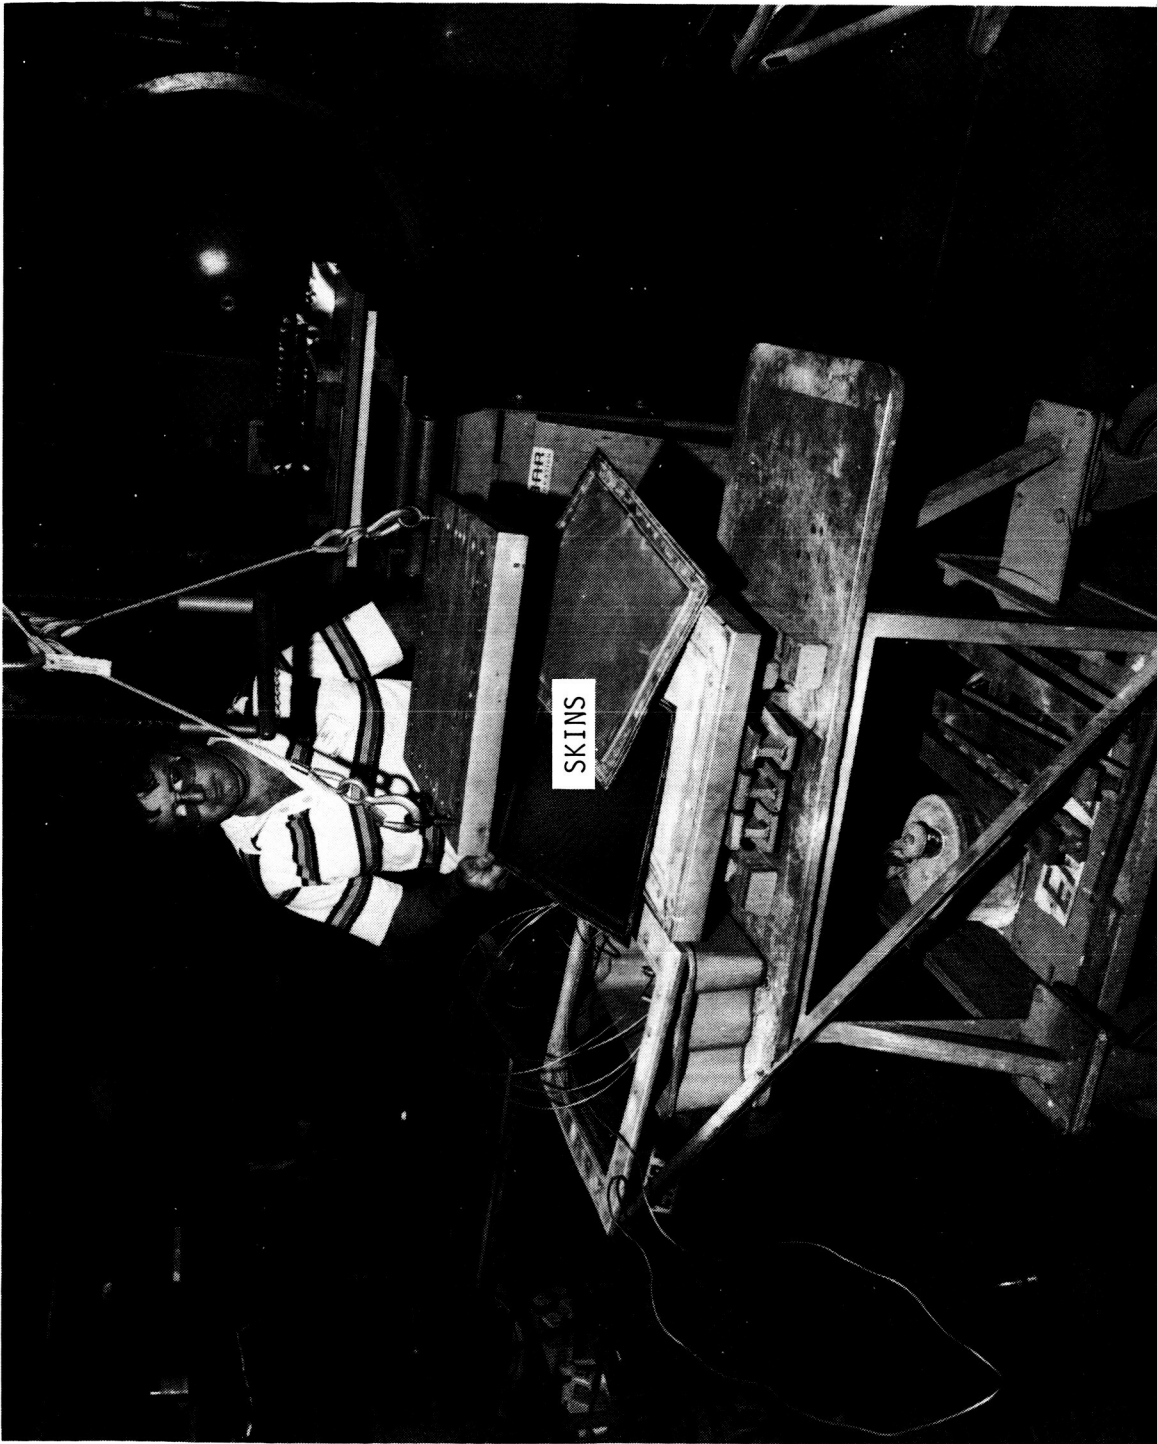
Tool Proof Parts (Un-Trimmed Titanium Skins) Being
